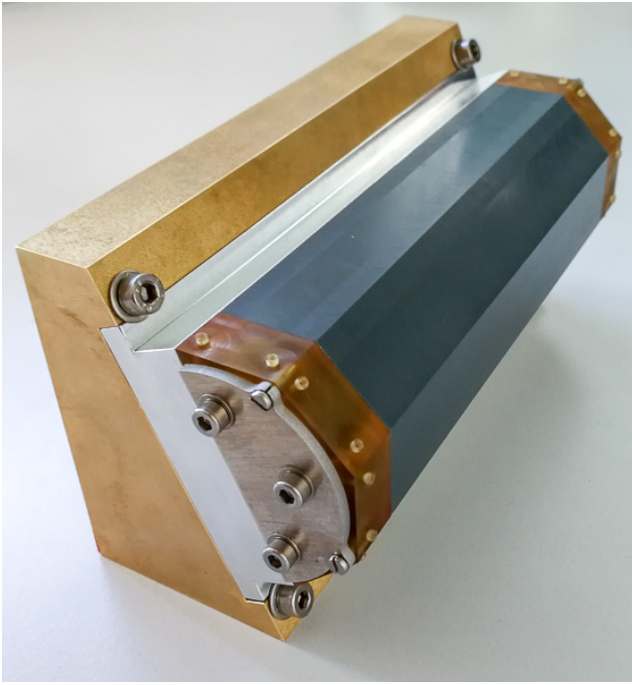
Assembly tool for layer 2 modules. Tilting of the full tool and sliding of the grey block allows to bring every facet into the horizontal position.
